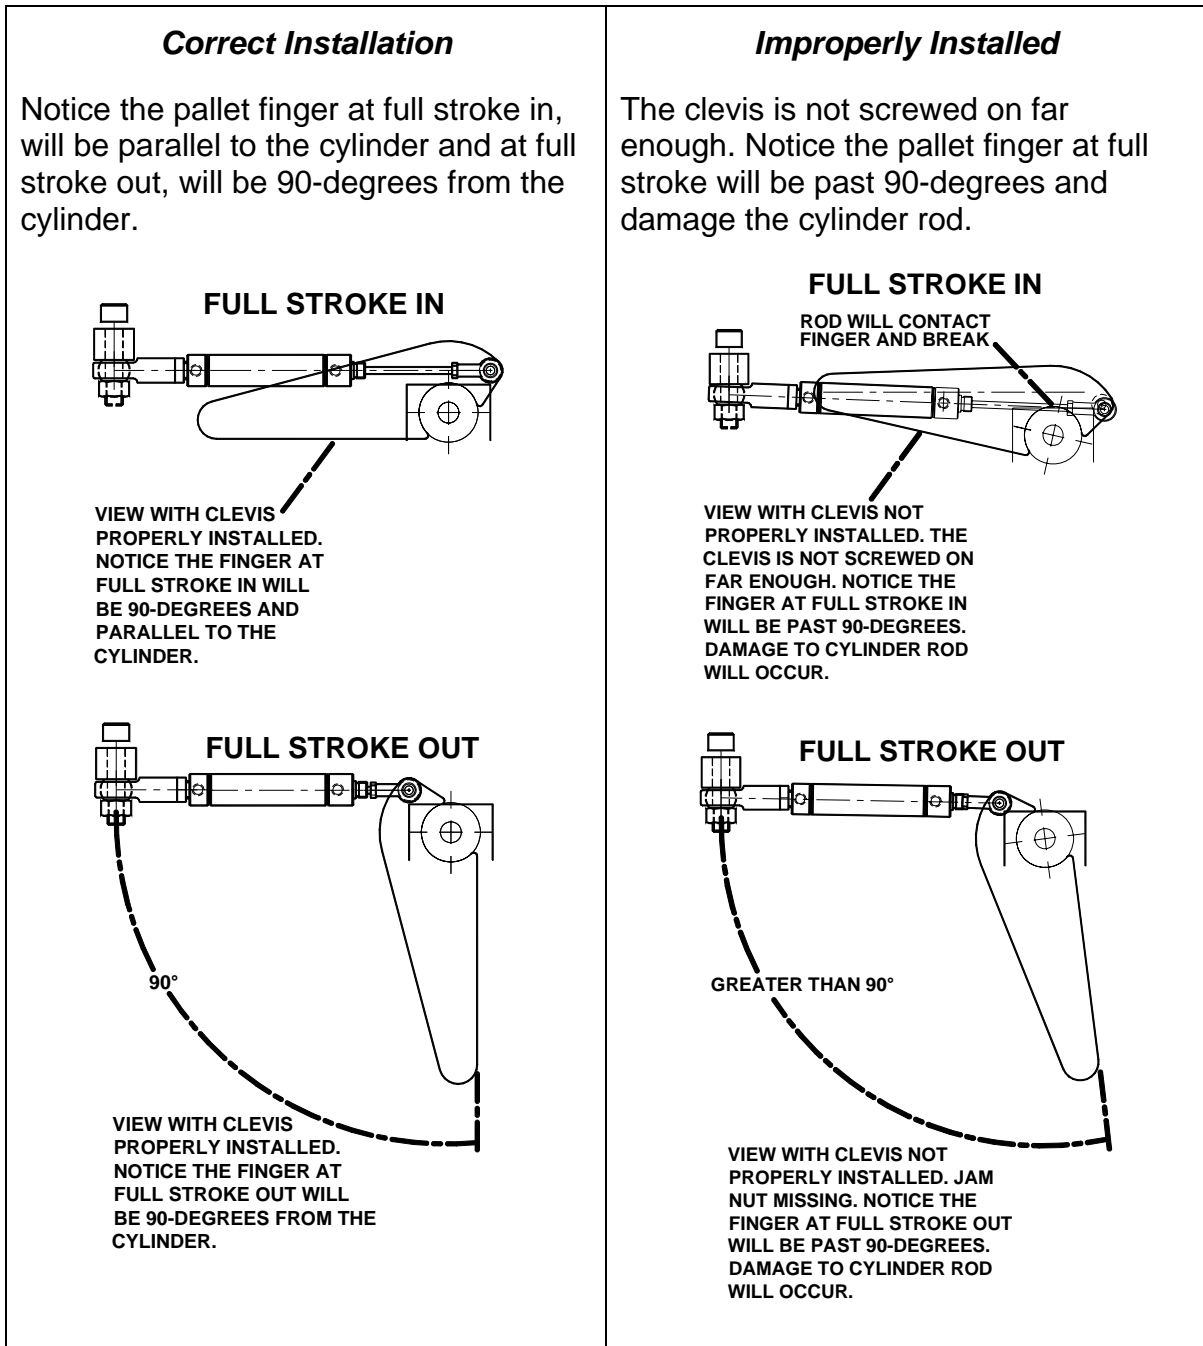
Pallet Dispenser Finger Air Cylinder Assembly
